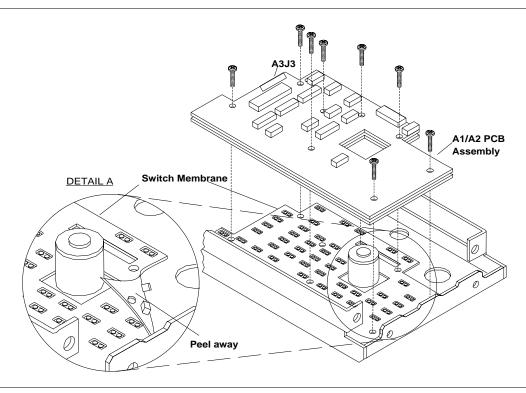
Exploded View of A2, A1, and A10 PCBs
